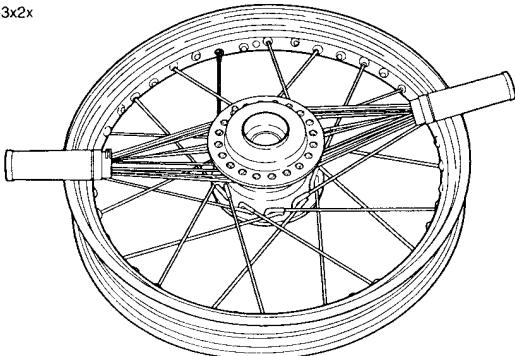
Beginning Spoke-Bottom Flange Outer
